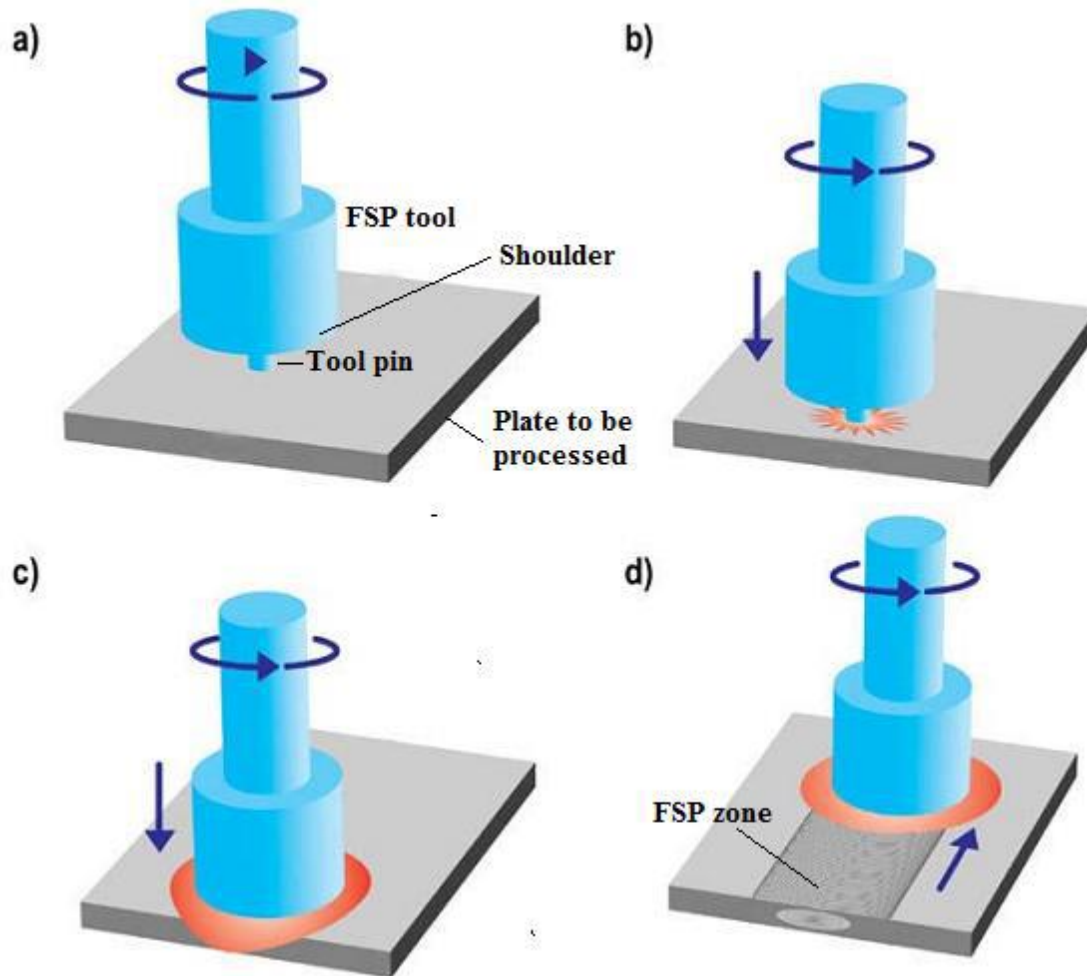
Steps of FSP (a) rotating tool prior to contact with the plate (b) tool pin makes contact with the plate, creating heat (c) shoulder makes contact, restricting further penetration while expanding the hot zone and (d) plate moves relative to the rotating tool, creating FSP [33]
